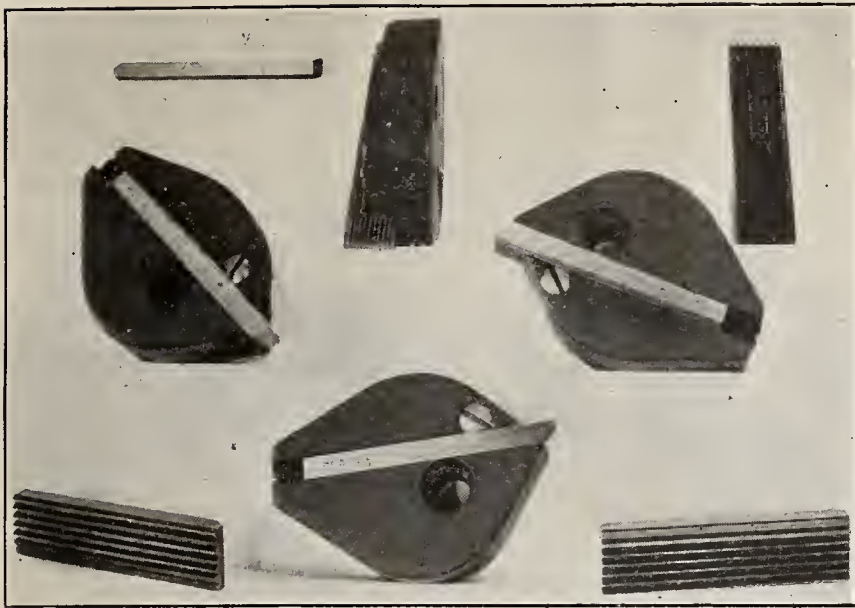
CHASERS AND HOLDERS OF LANDIS BOLT CUTTER.
